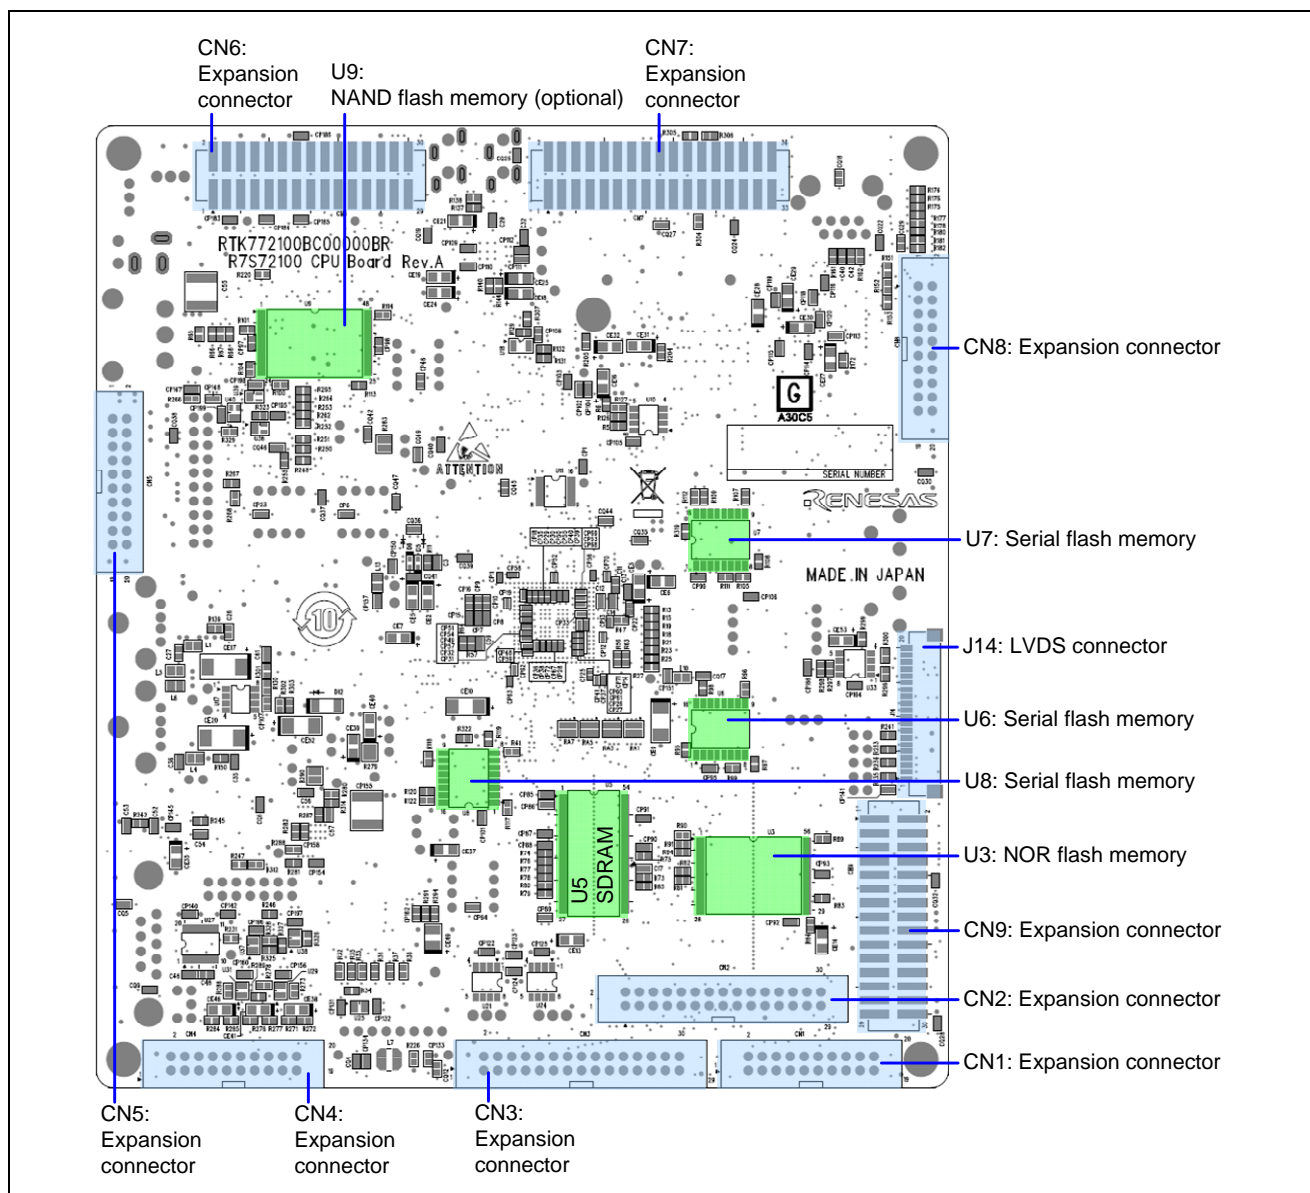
RTK772100BC00000BR Parts Layout (Top View of Solder Side)
